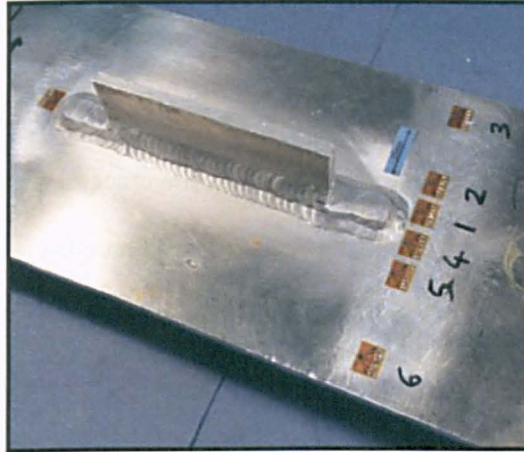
Fillet welded specimen with centre hole measurements performed across the plate width close to the end of the welded attachment.
